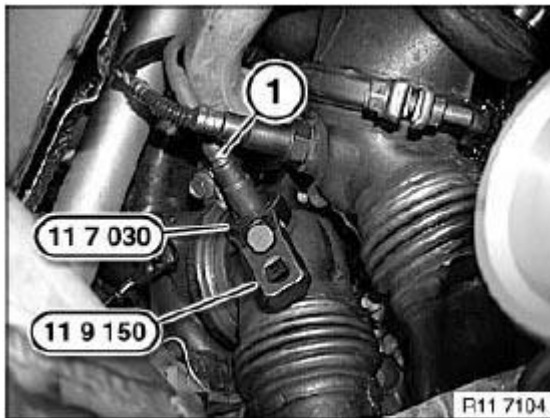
Removing Oxygen Control Sensor Using Special Tools 11 7 030 And 11 9 150
